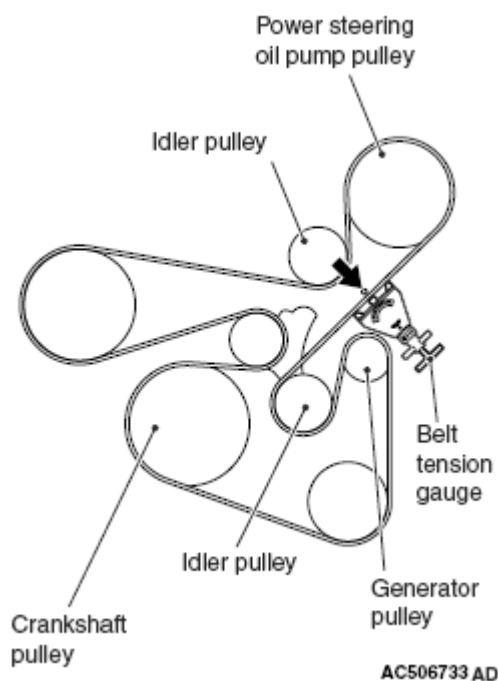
Checking Belt Tension Using Belt Tension Gauge
